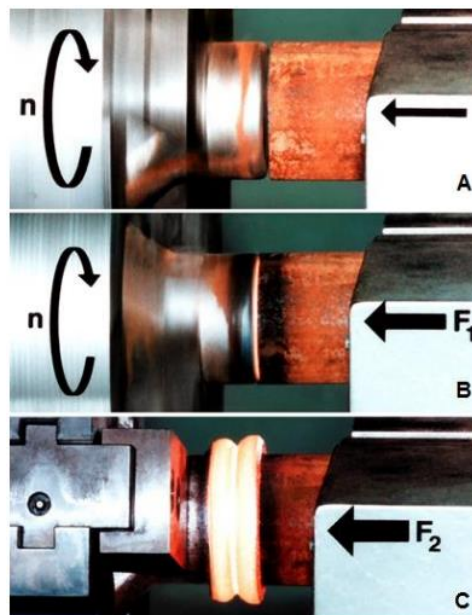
Three stages of Rotary Friction Welding Process
